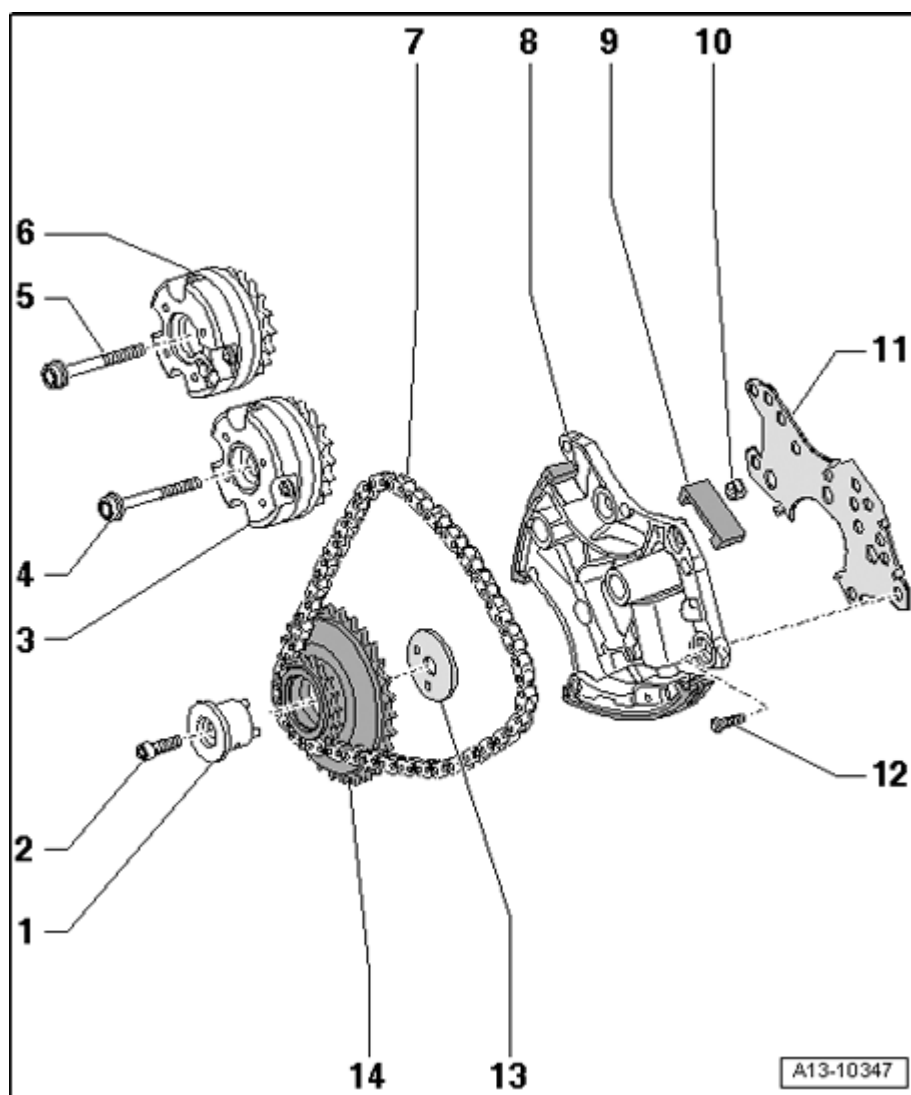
Camshaft Timing Chain, Assembly Overview (Right Camshaft Timing Chain)
